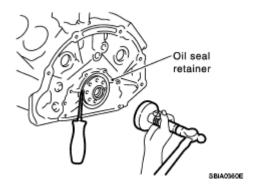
View Of Removing Oil Seal Retainer Courtesy of NISSAN MOTOR CO., U.S.A.
